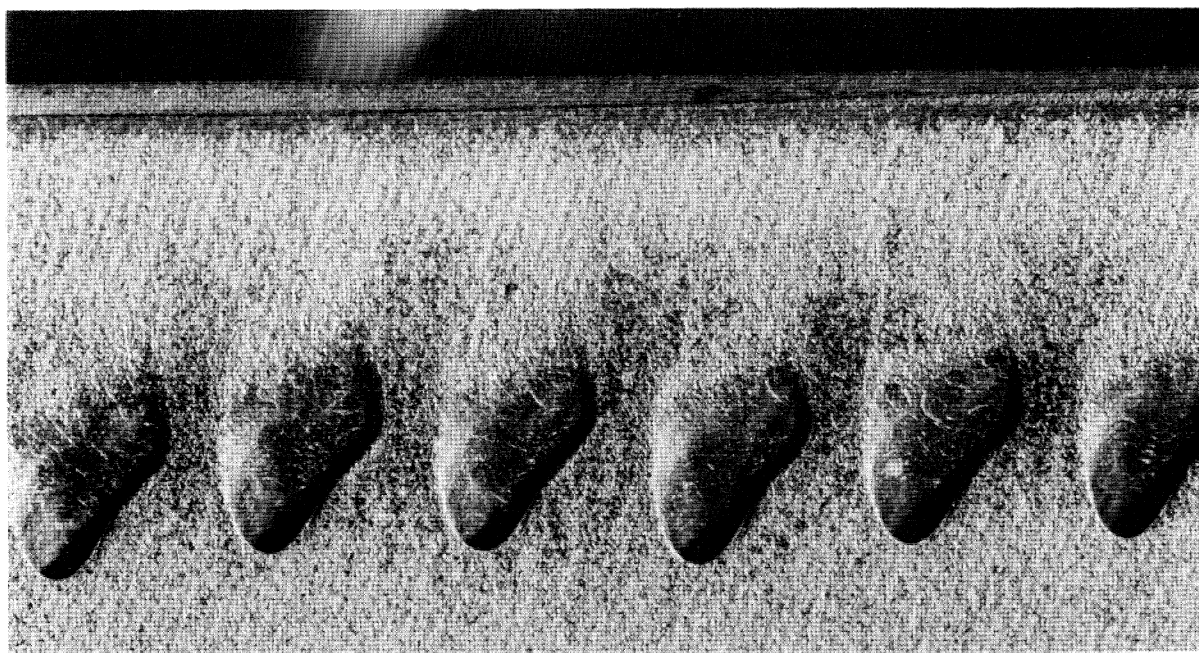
Contouring of hole at the surface for improved flow, by electrojet machining. (Magn.  $\times 13.5$ .)
